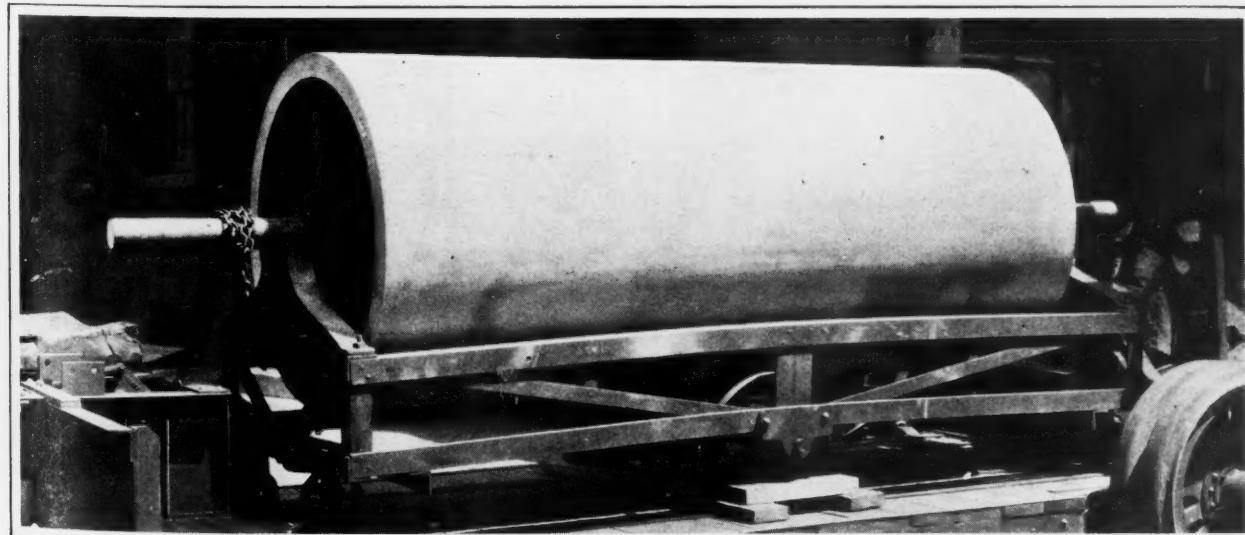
Carpet Printing Roll Covered by Metal Spraying Process, Ready for Grinding, Polishing, and Engraving
